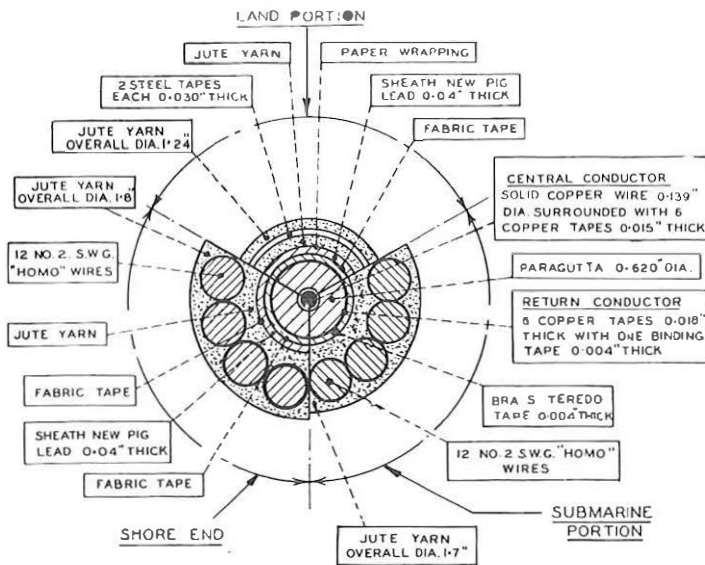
CROSS SECTIONS OF THE CABLE.
